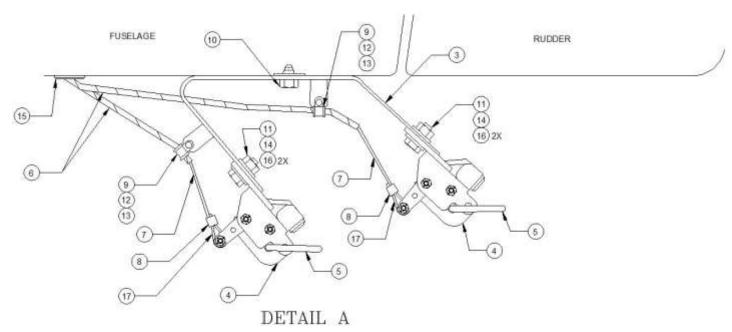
PATH Tow Hook Installation for Cessna 150, 172, ETC., Detail A
